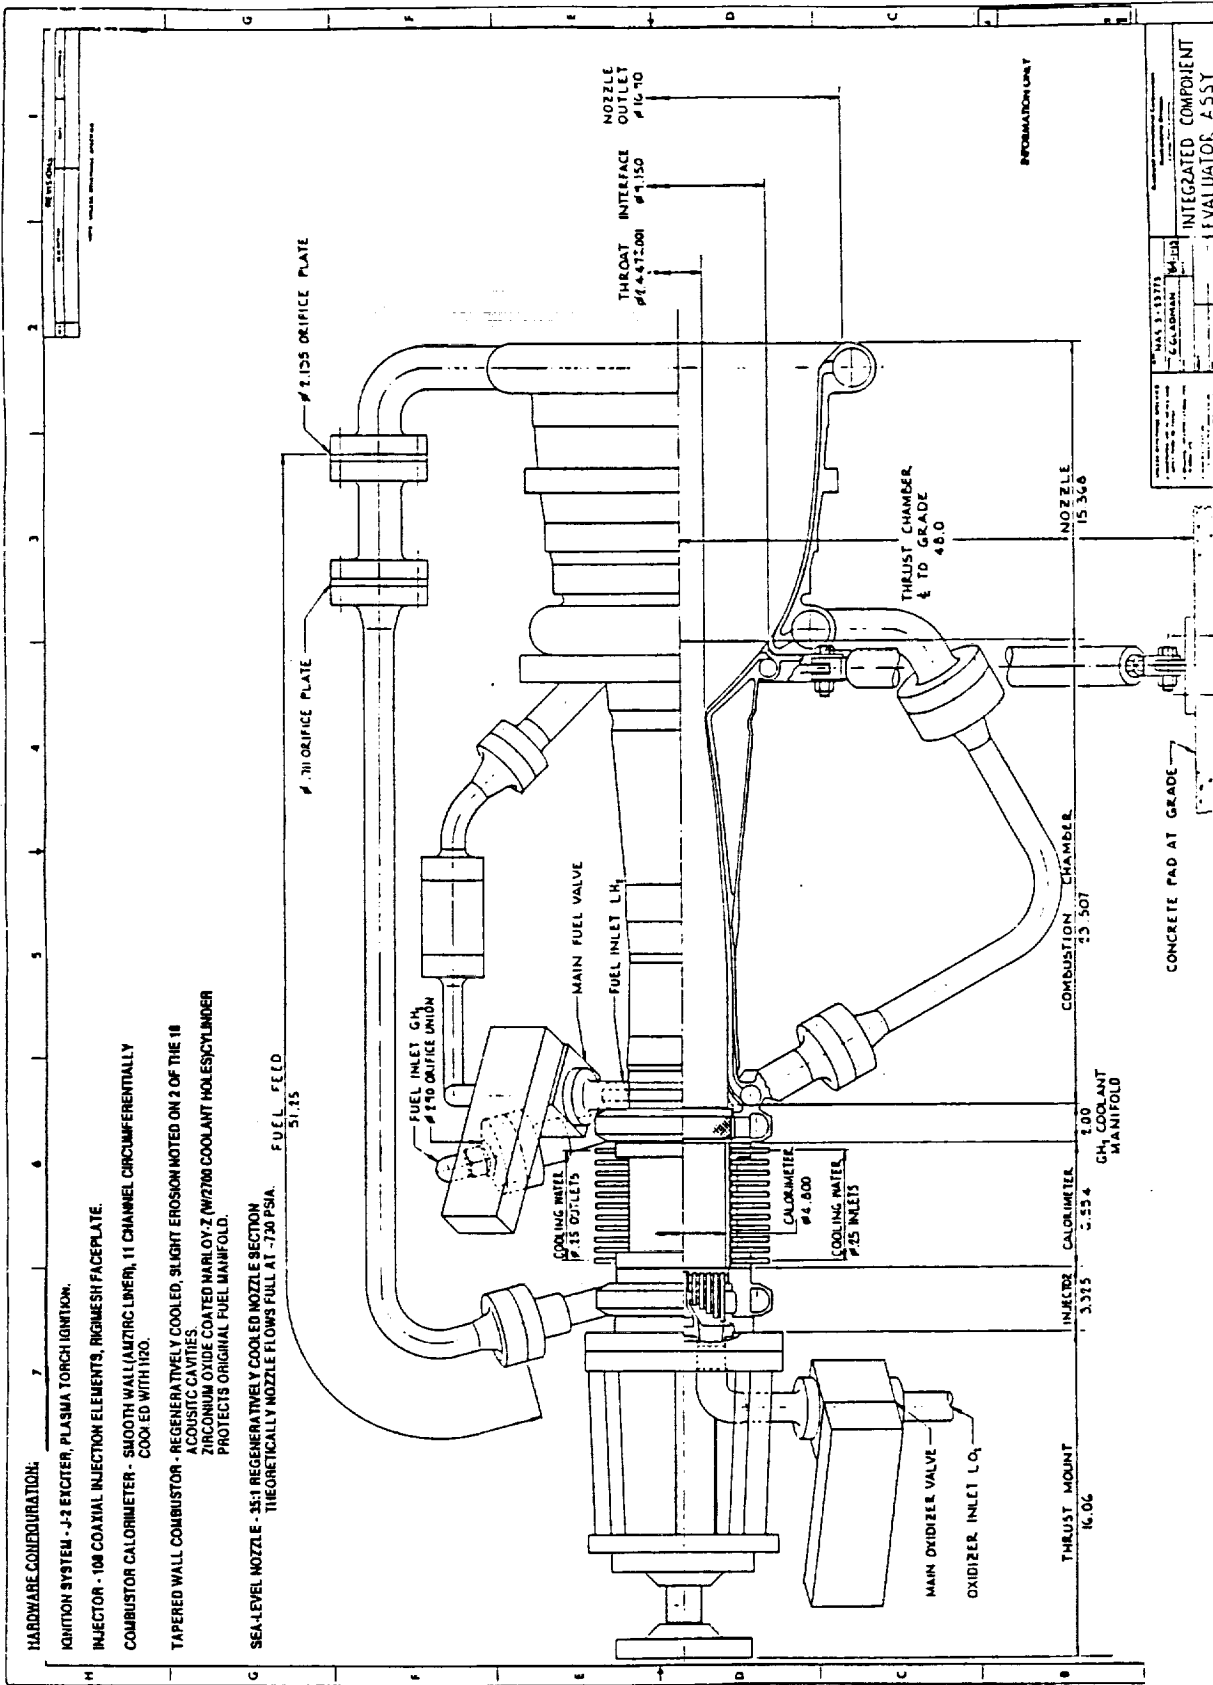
Integrated Component Evaluator (I.C.E.) Thrust Chamber Assembly - Enhanced Heat Transfer Combustor Configuration
